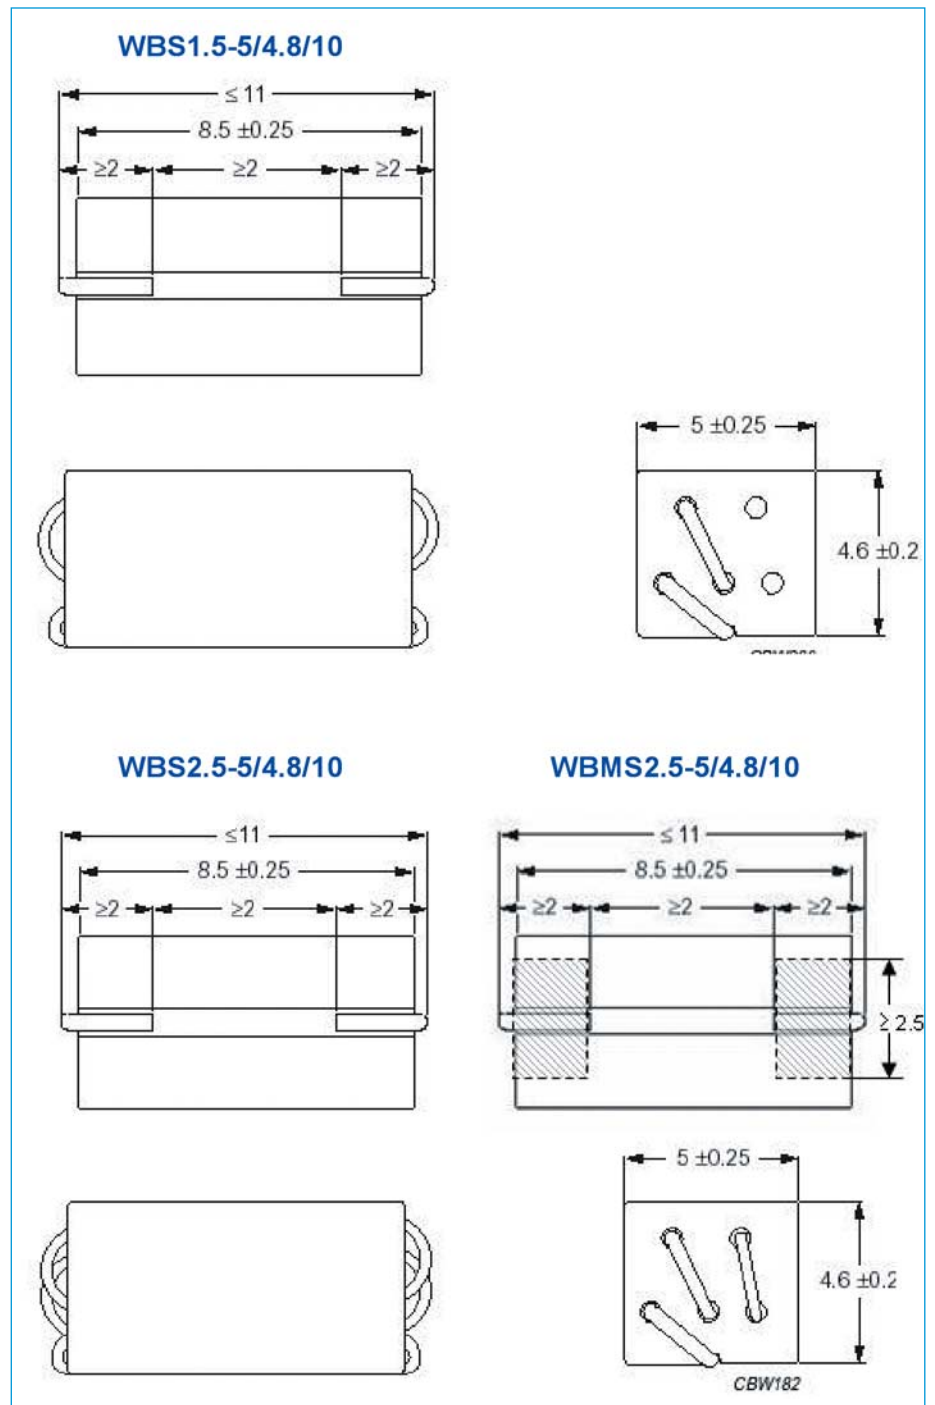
SMD wide-band chokes dimensions (in millimeters)
